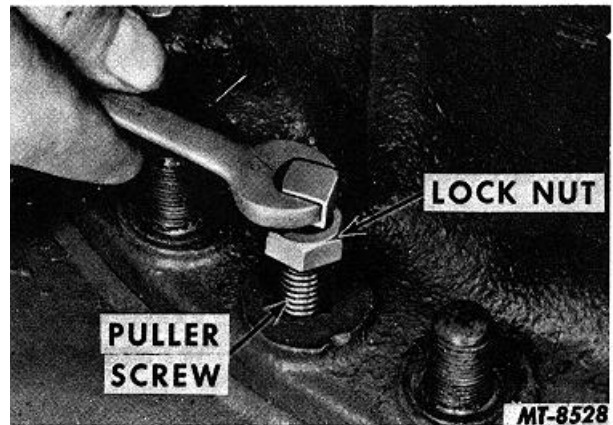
Puller Screw Installation (Locknut is used if puller screw is to be kept with axle at all times.)
